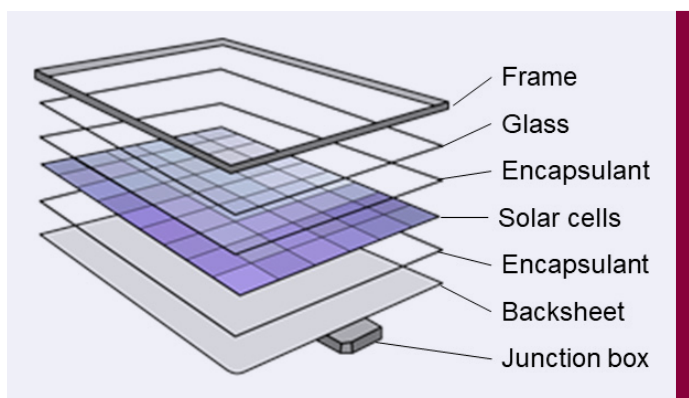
Exploded view of a solar PV module. Courtesy of Dow Chemical Company.
